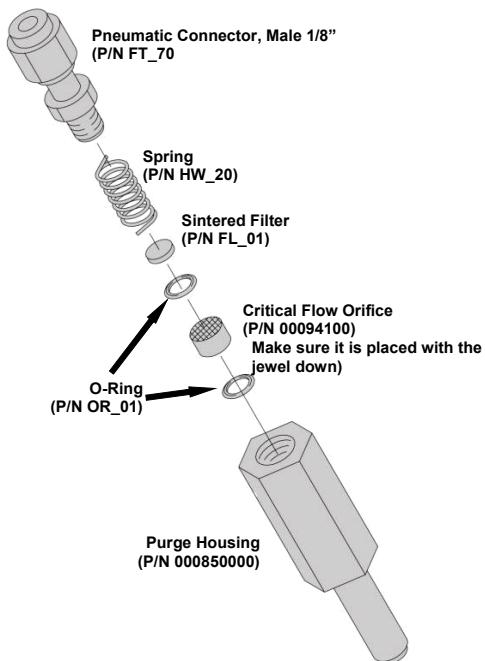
Critical Flow Restrictor Assembly Disassembly
